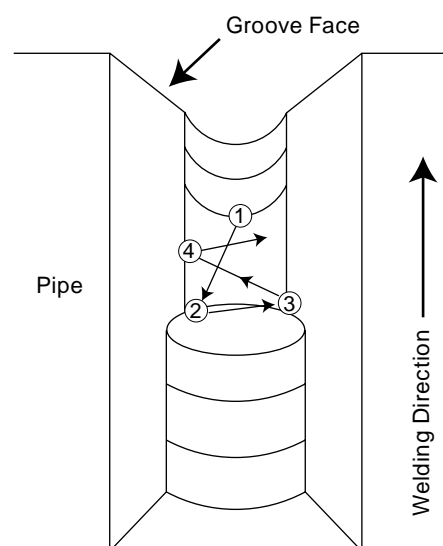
The Backstep Technique in Vertical-Up Position Welding of Pipes
